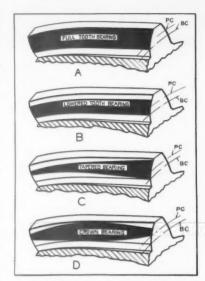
Diagram showing "full," "low," "tapered" and "crown" Tooth Bearings.
